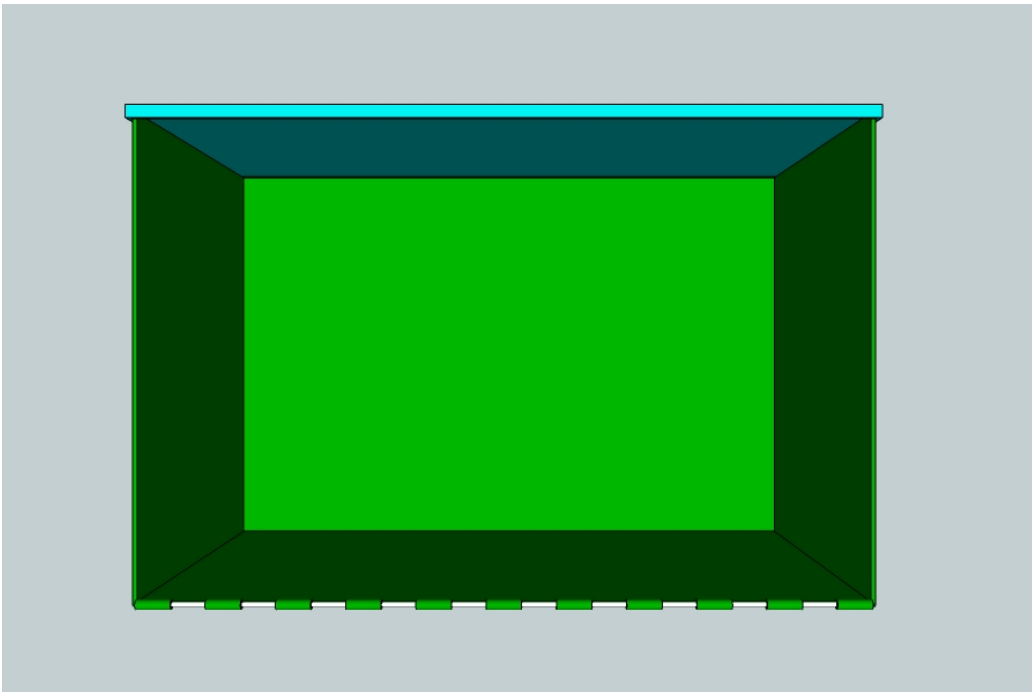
The Folding Side Wall Tote (FSW Tote) – Side View with Folding Side Removed
